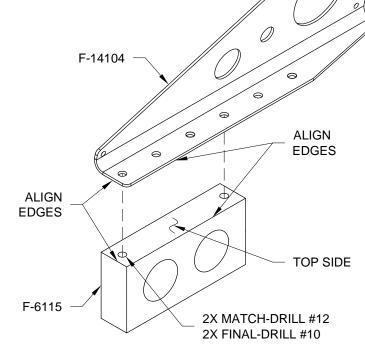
DRILL RUDDER PEDAL BEARING BLOCK
